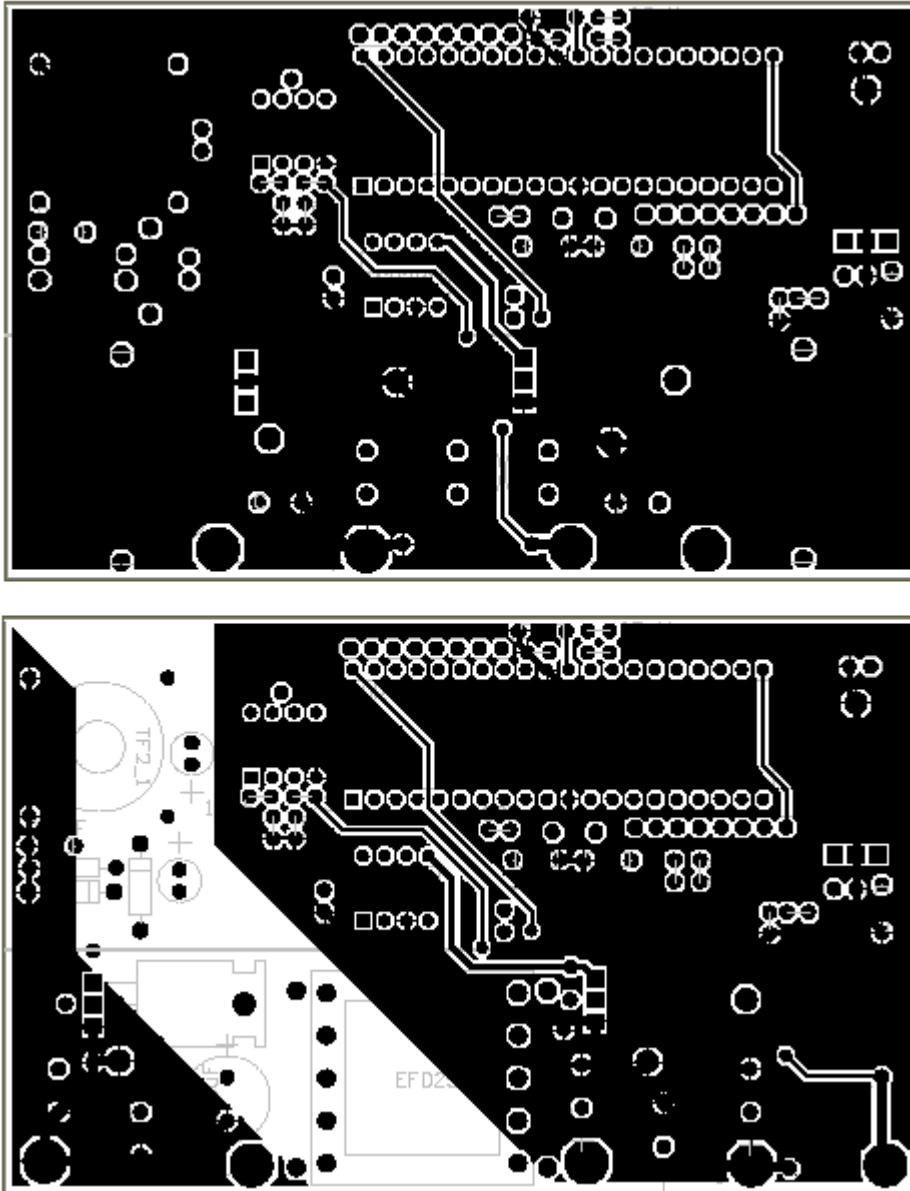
Bottomlayer PCB with ground plane, Cuk (top), Flyback (bottom)
